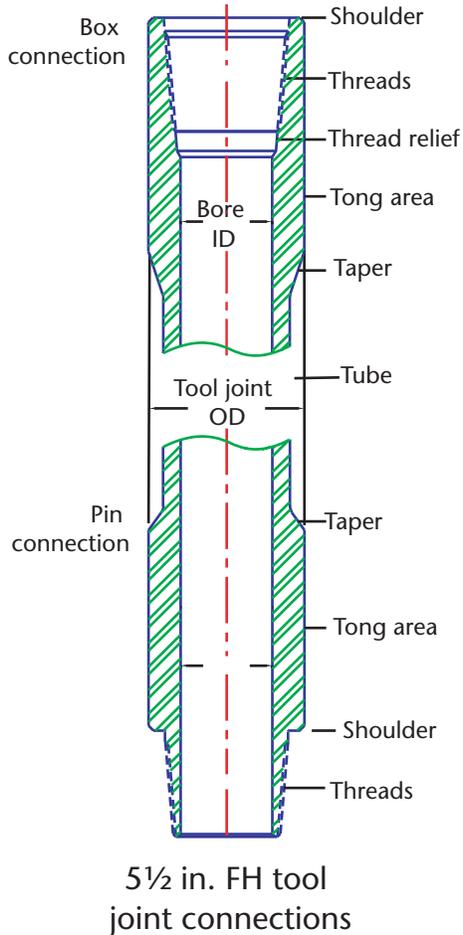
Schematic of the box and pin ends of a joint of pipe. The tube section is cut away to shorten the drawing. ID = internal diameter, OD = outside diameter, FH = full note.
